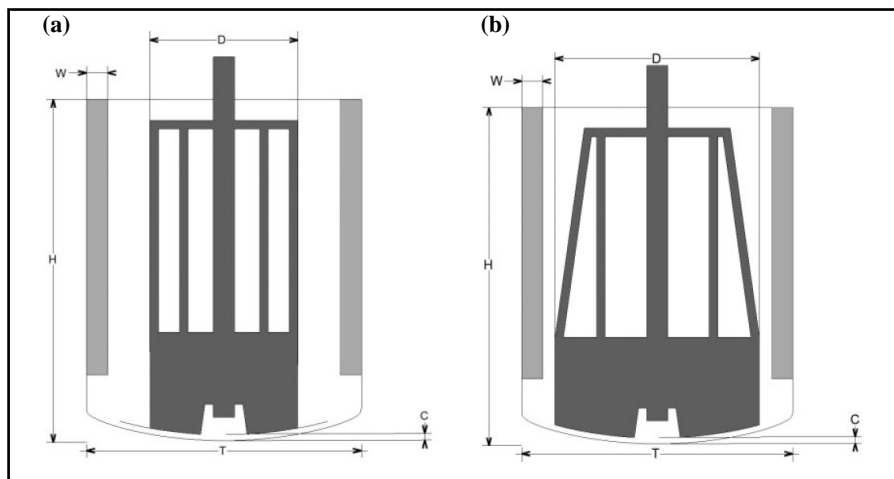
(a) Straight Maxblend impeller (b) Wedge Maxblend impeller
